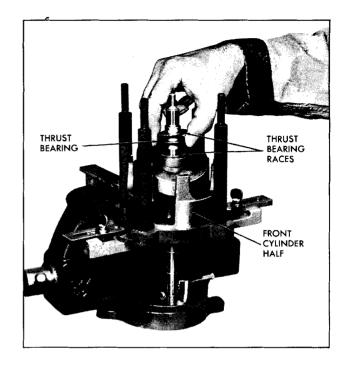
A-84 Mainshaft Thrust Bearing Installed
